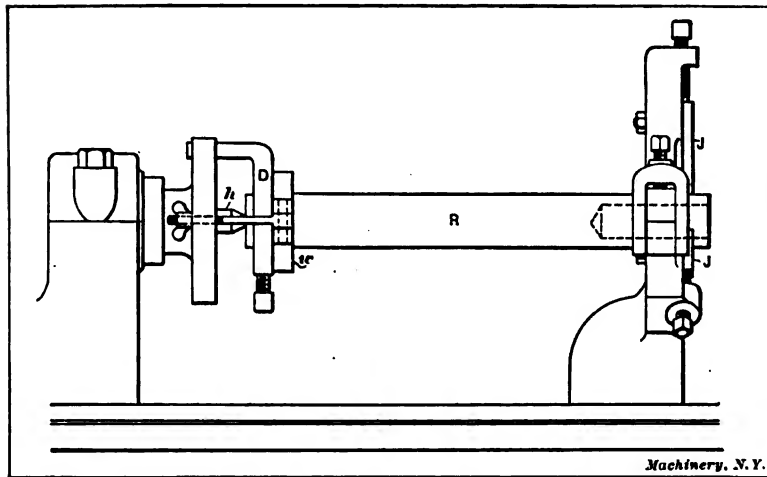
Shaft supported by Steadyrest for Drilling and Boring End
